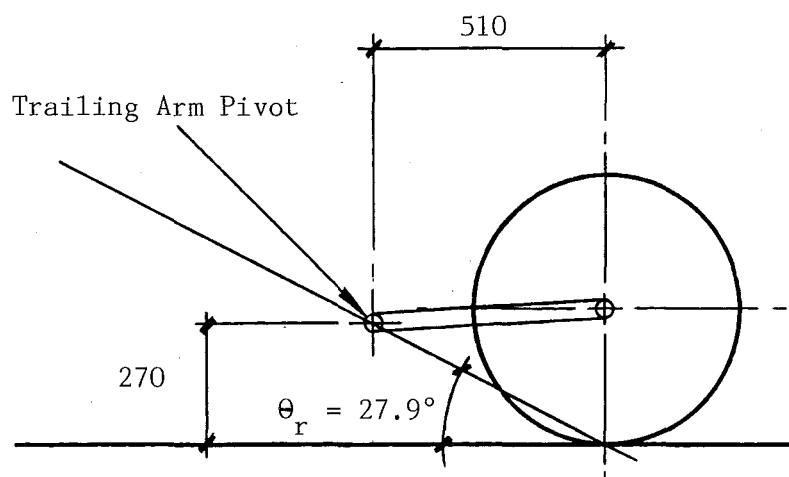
Rear Suspension Trailing Arm, Side Elevation.
